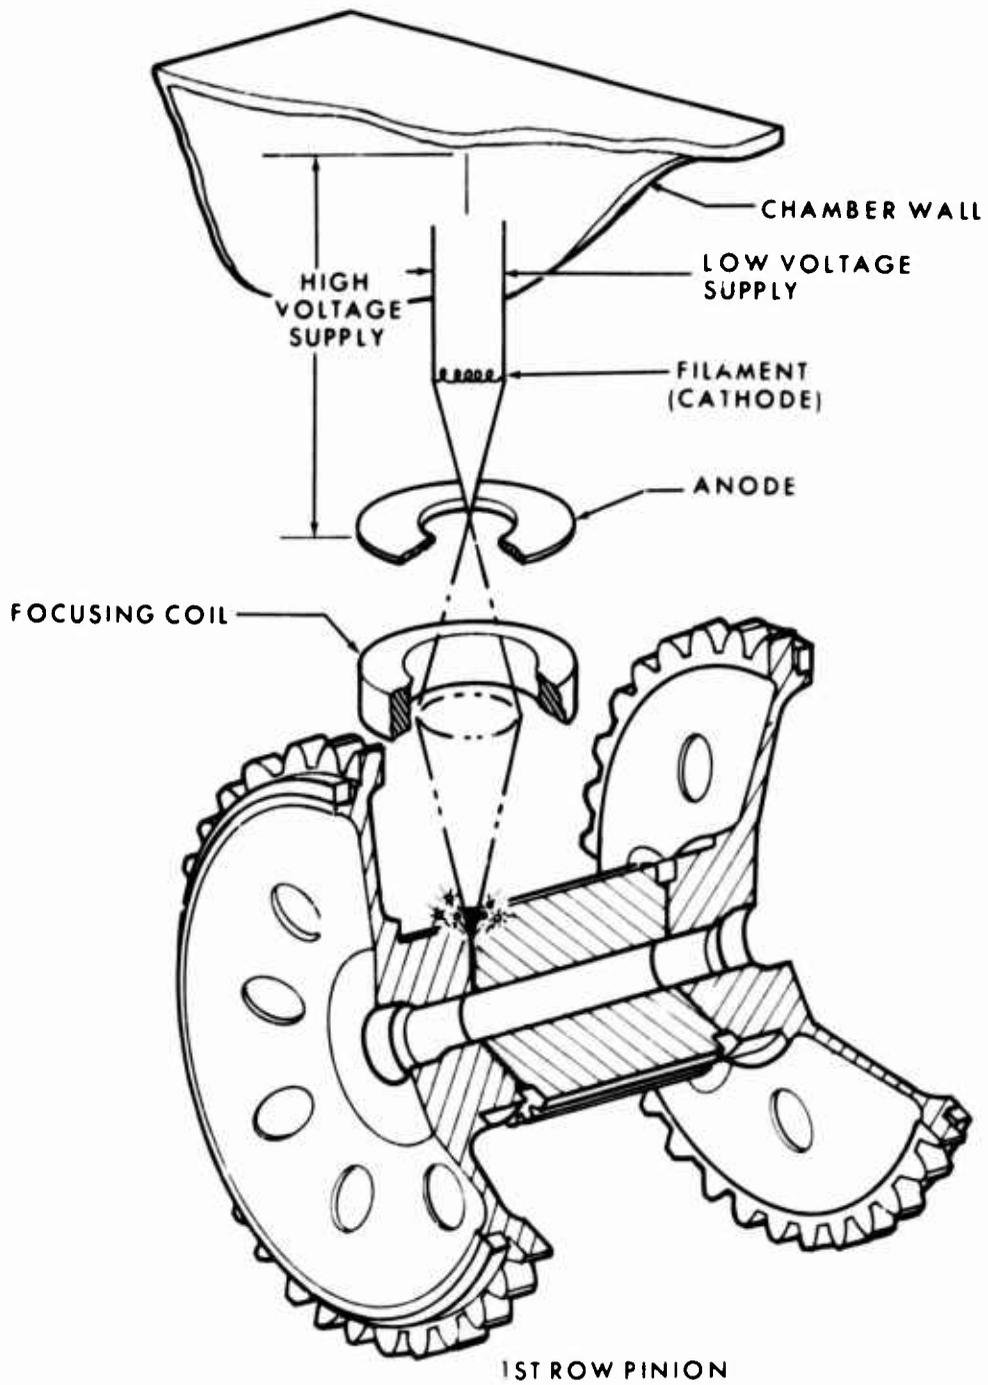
Electron Beam Welding Process, Schematic.
